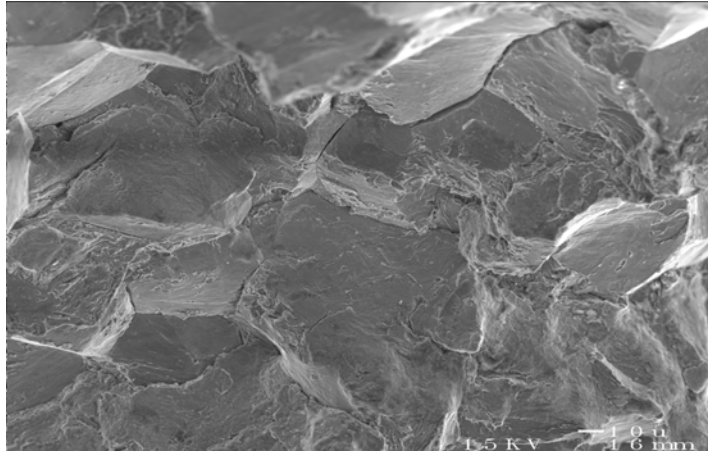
Fractograph of a MIL-120S weld metal hydrogen crack from cruciform weld W351.
